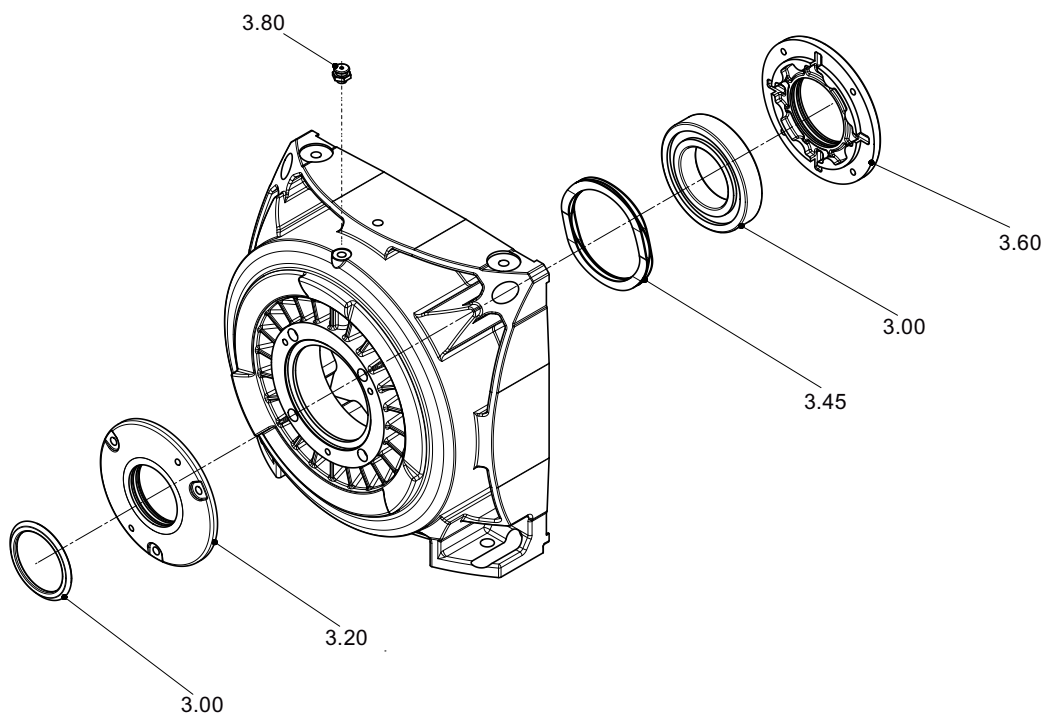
Rolling-contact bearing bush drive end, with coupling output, with regreasing
